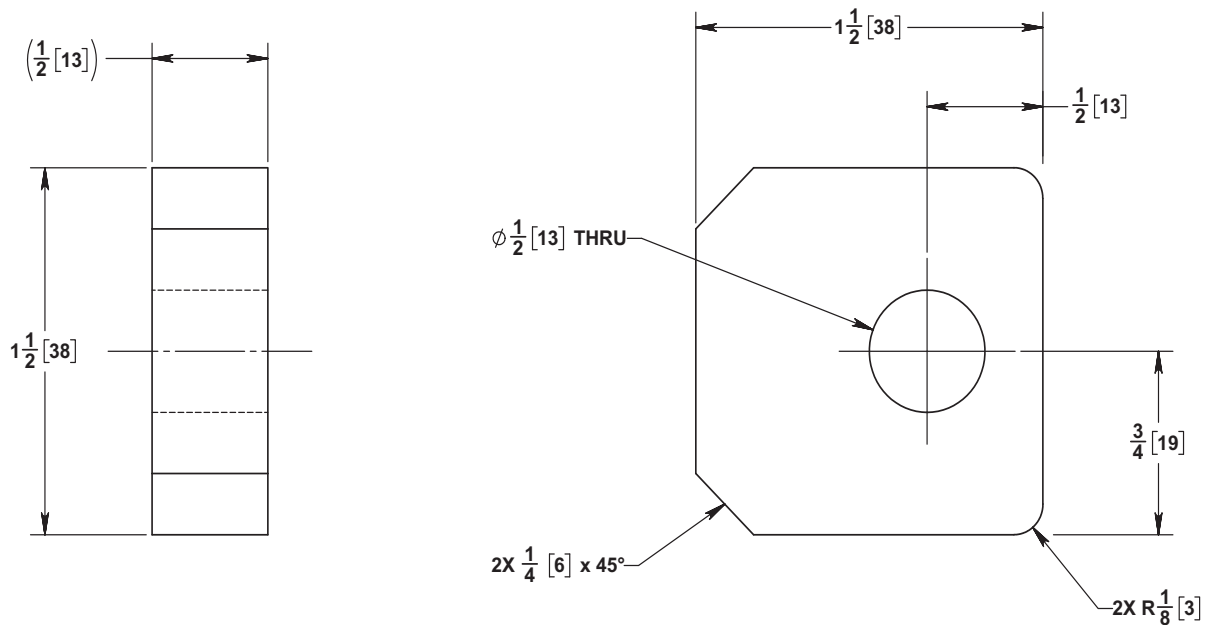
Item 1 (DT26999), A572-50 Weld plate size 1/2 x 1 1/2 x 1 1/2 (QTY 2)
